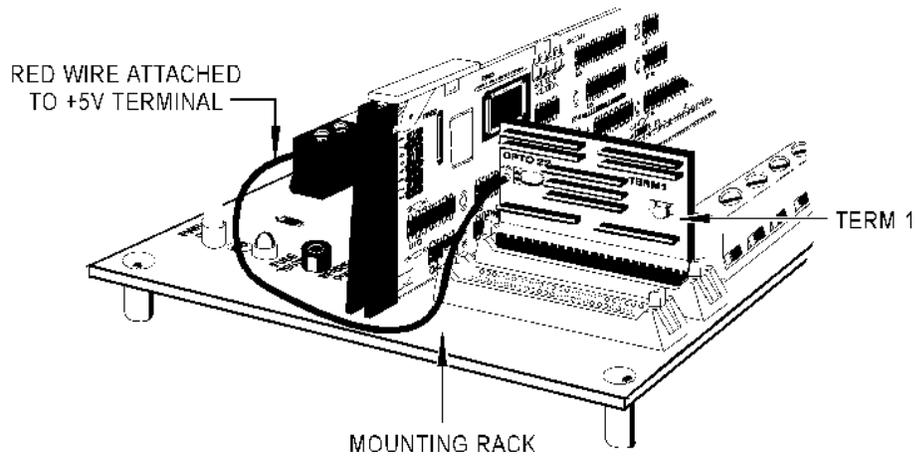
Terminator Board Installed on a B4-Compatible Mounting Rack
